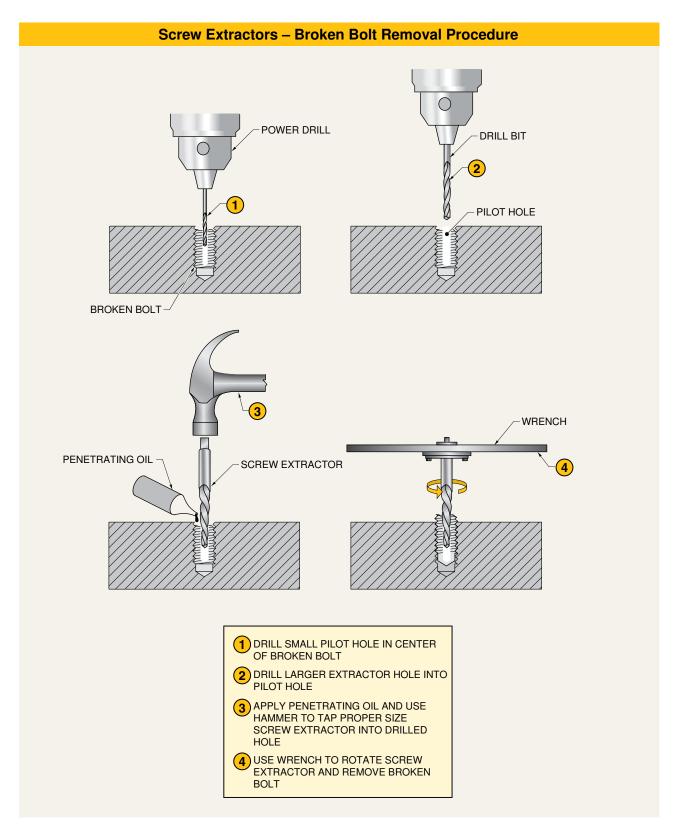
Screw extractors are used to remove broken bolts and screws from equipment without causing damage to screw threads or equipment.
